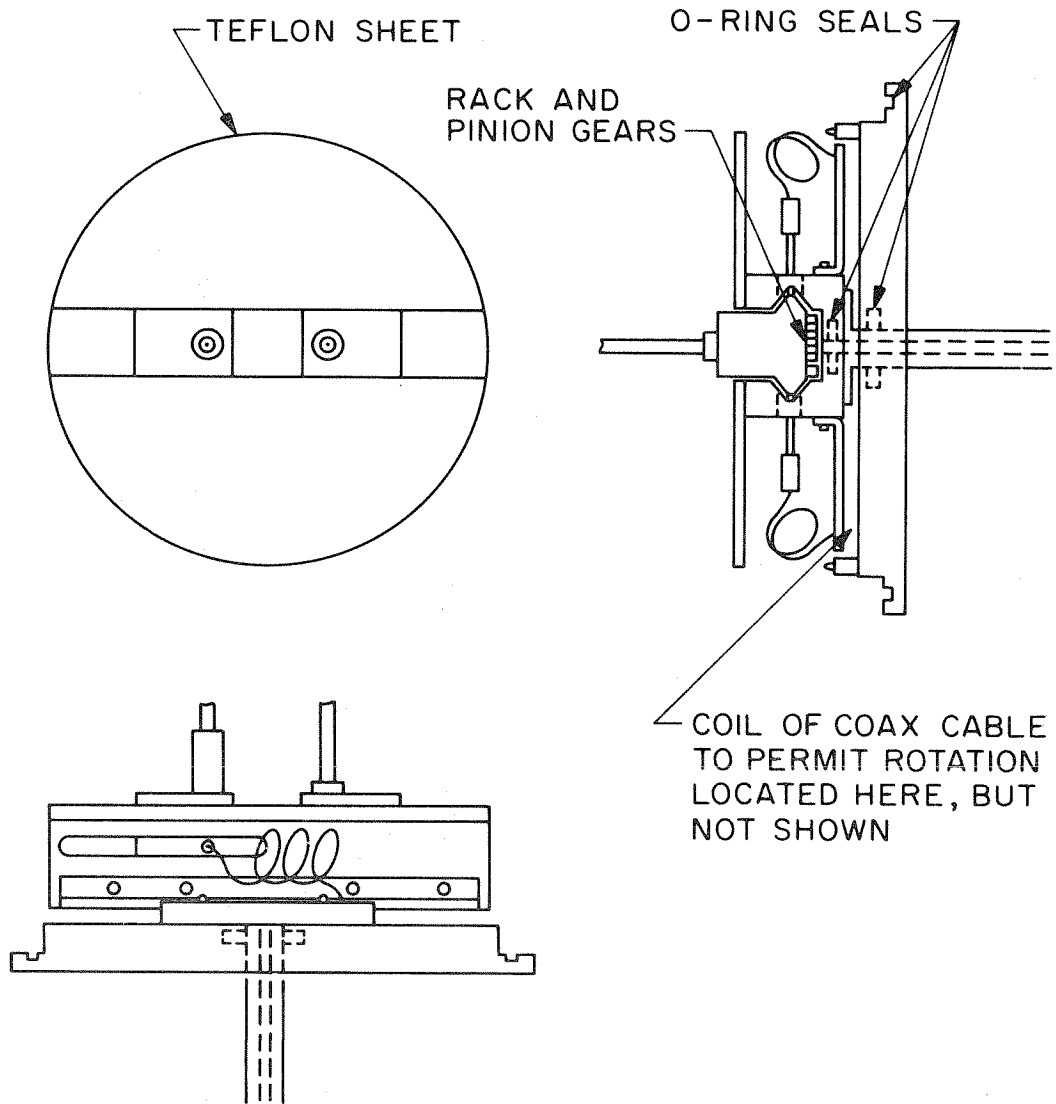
Engineering drawing of the probe carriage (scale 0.25:1).
